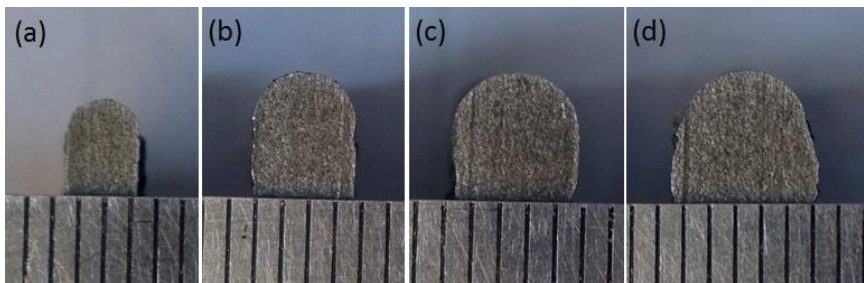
Specimens of Group 2: (a) specimen 5, (b) specimen 6, (c) specimen 7, (d) specimen 8
